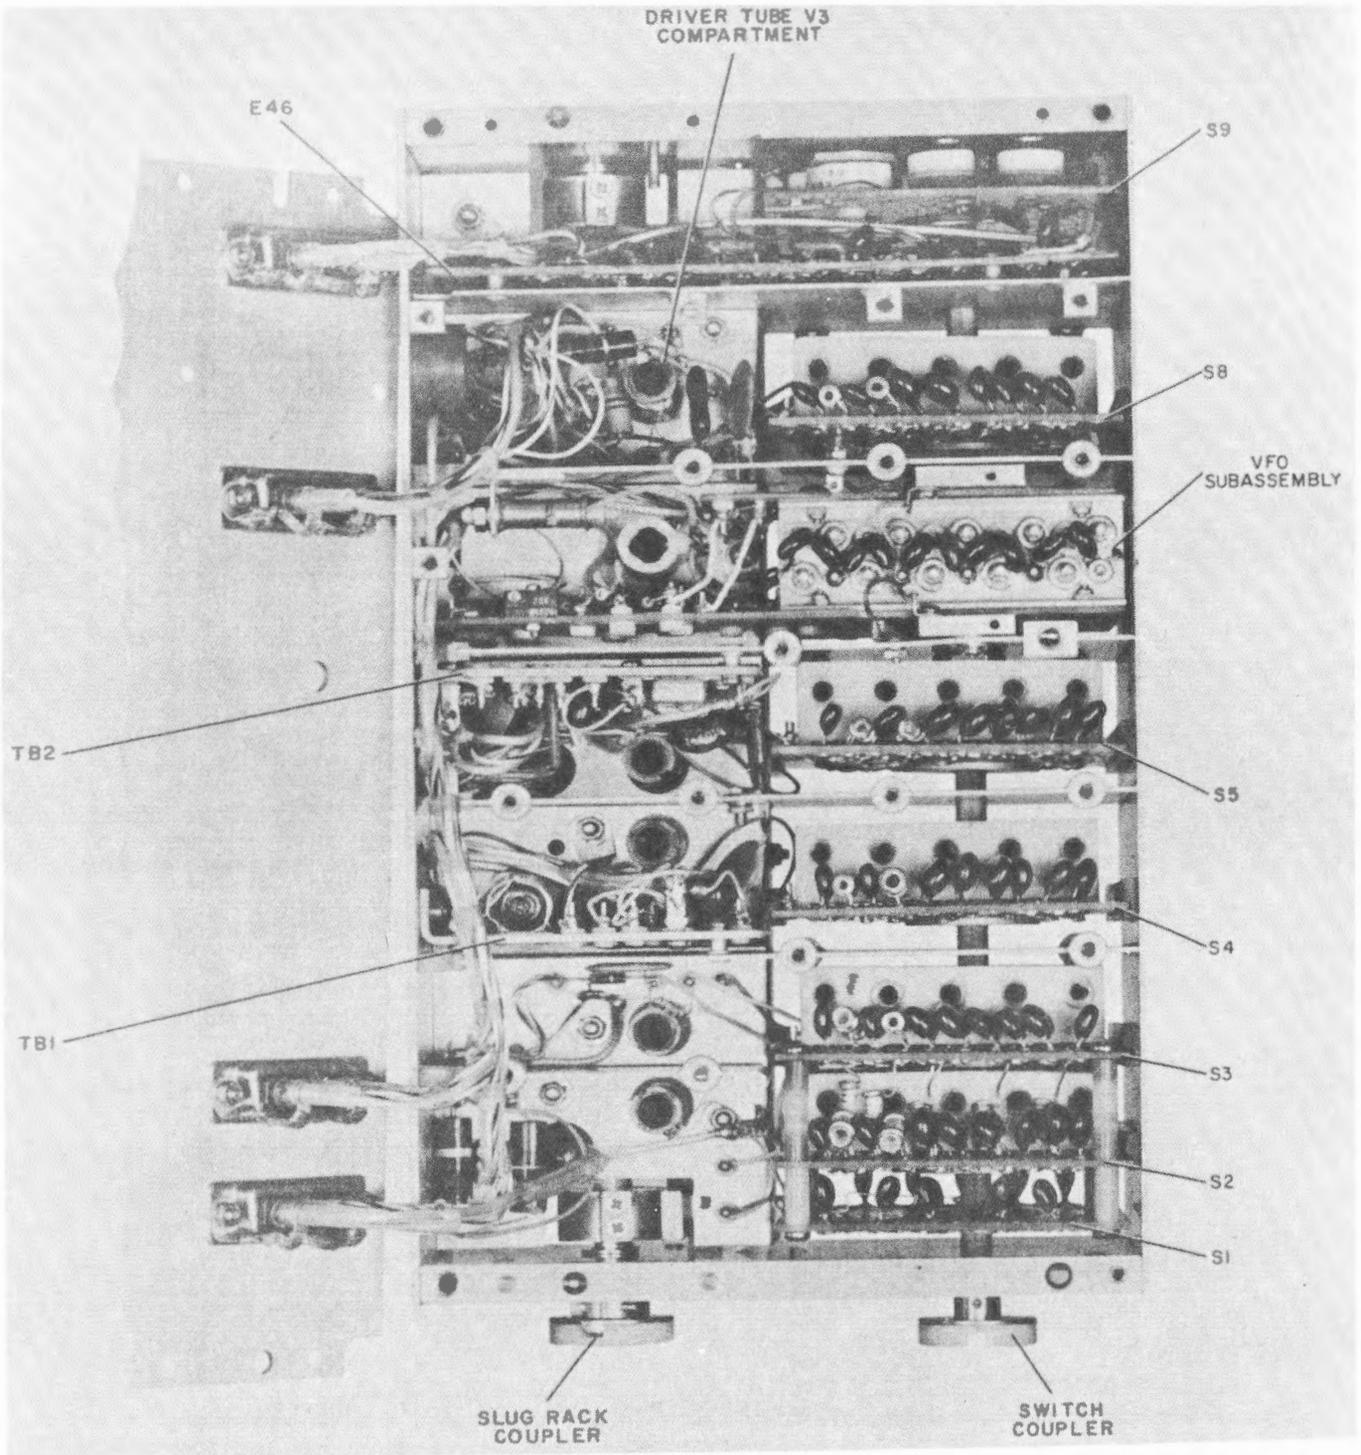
A. Signal Data Translator CV-1377A/PRC-47 (A3), Bottom View, Location of Card Assemblies and Switch Cards
